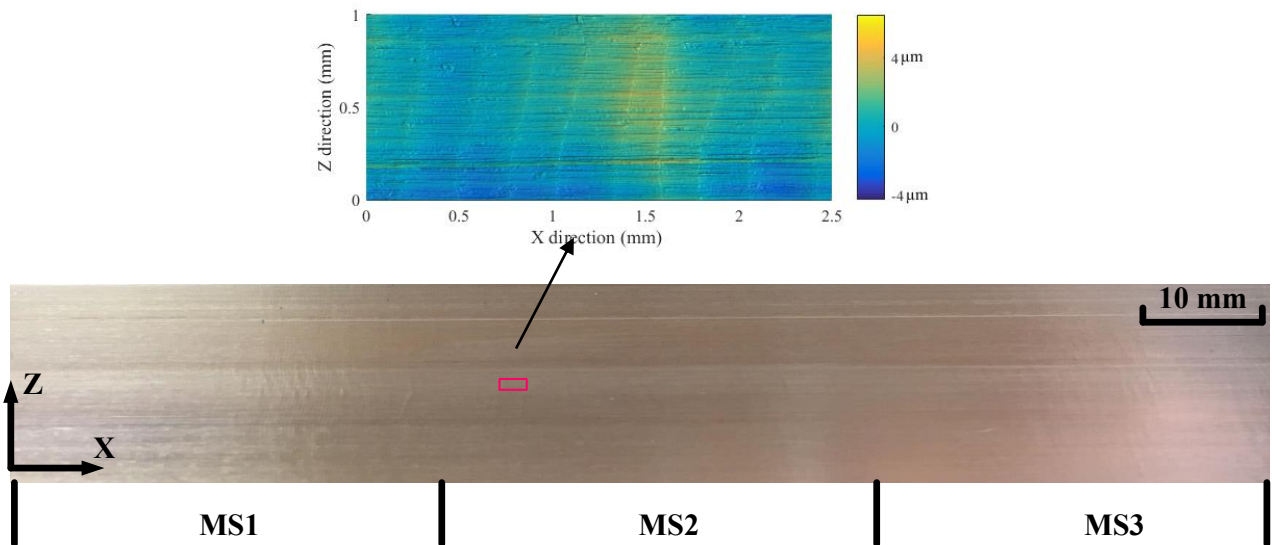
Surface topography of workpiece for the machining parameter (3500 rpm, 16 mm)
